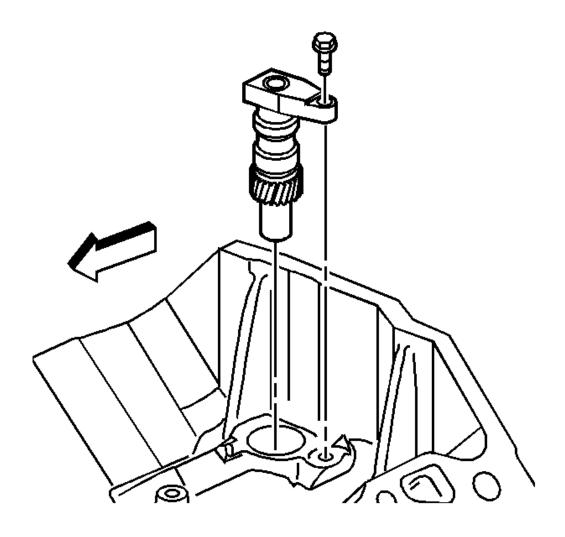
View Of Oil Pump Drive Courtesy of GENERAL MOTORS CORP.
